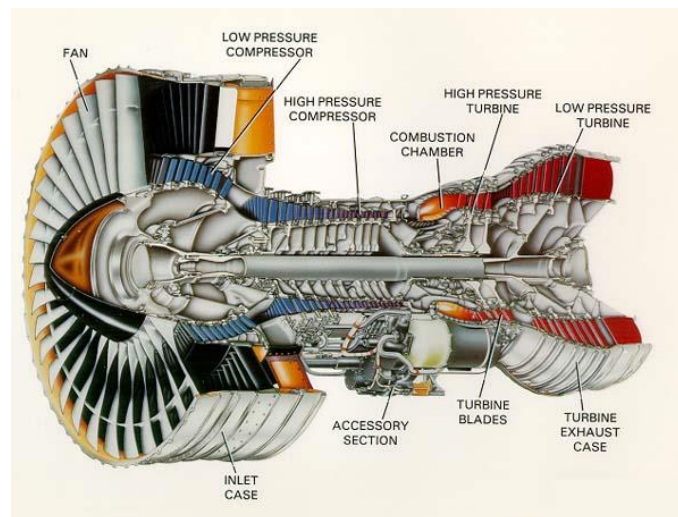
Cutaway of Gas Turbine Engine (Reprinted from [10])
